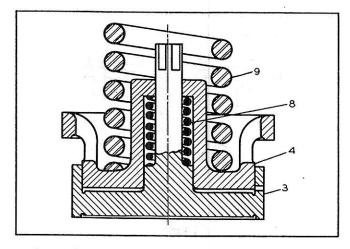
Discharge Valve, Y-12 Type - 6" and 6-1/2" Compressors
